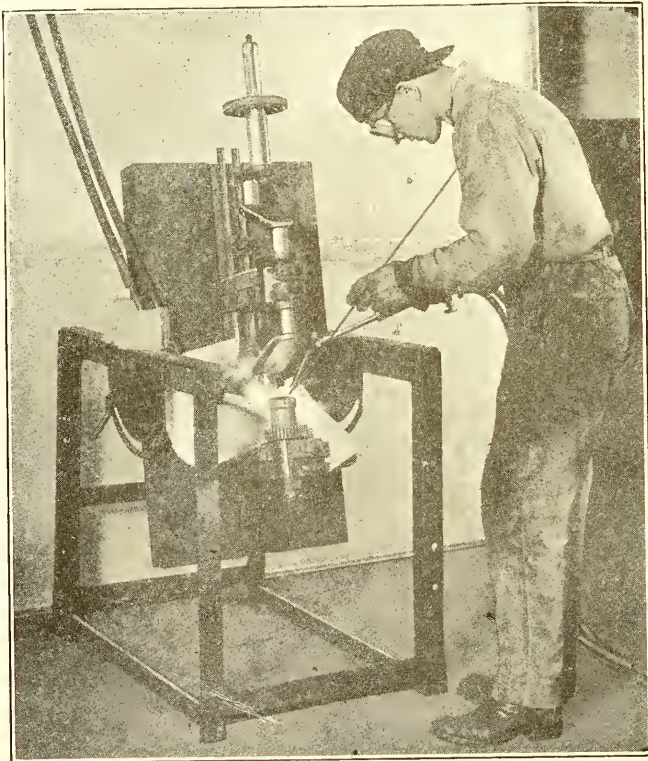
Welding a Broken Web in the Jig.
